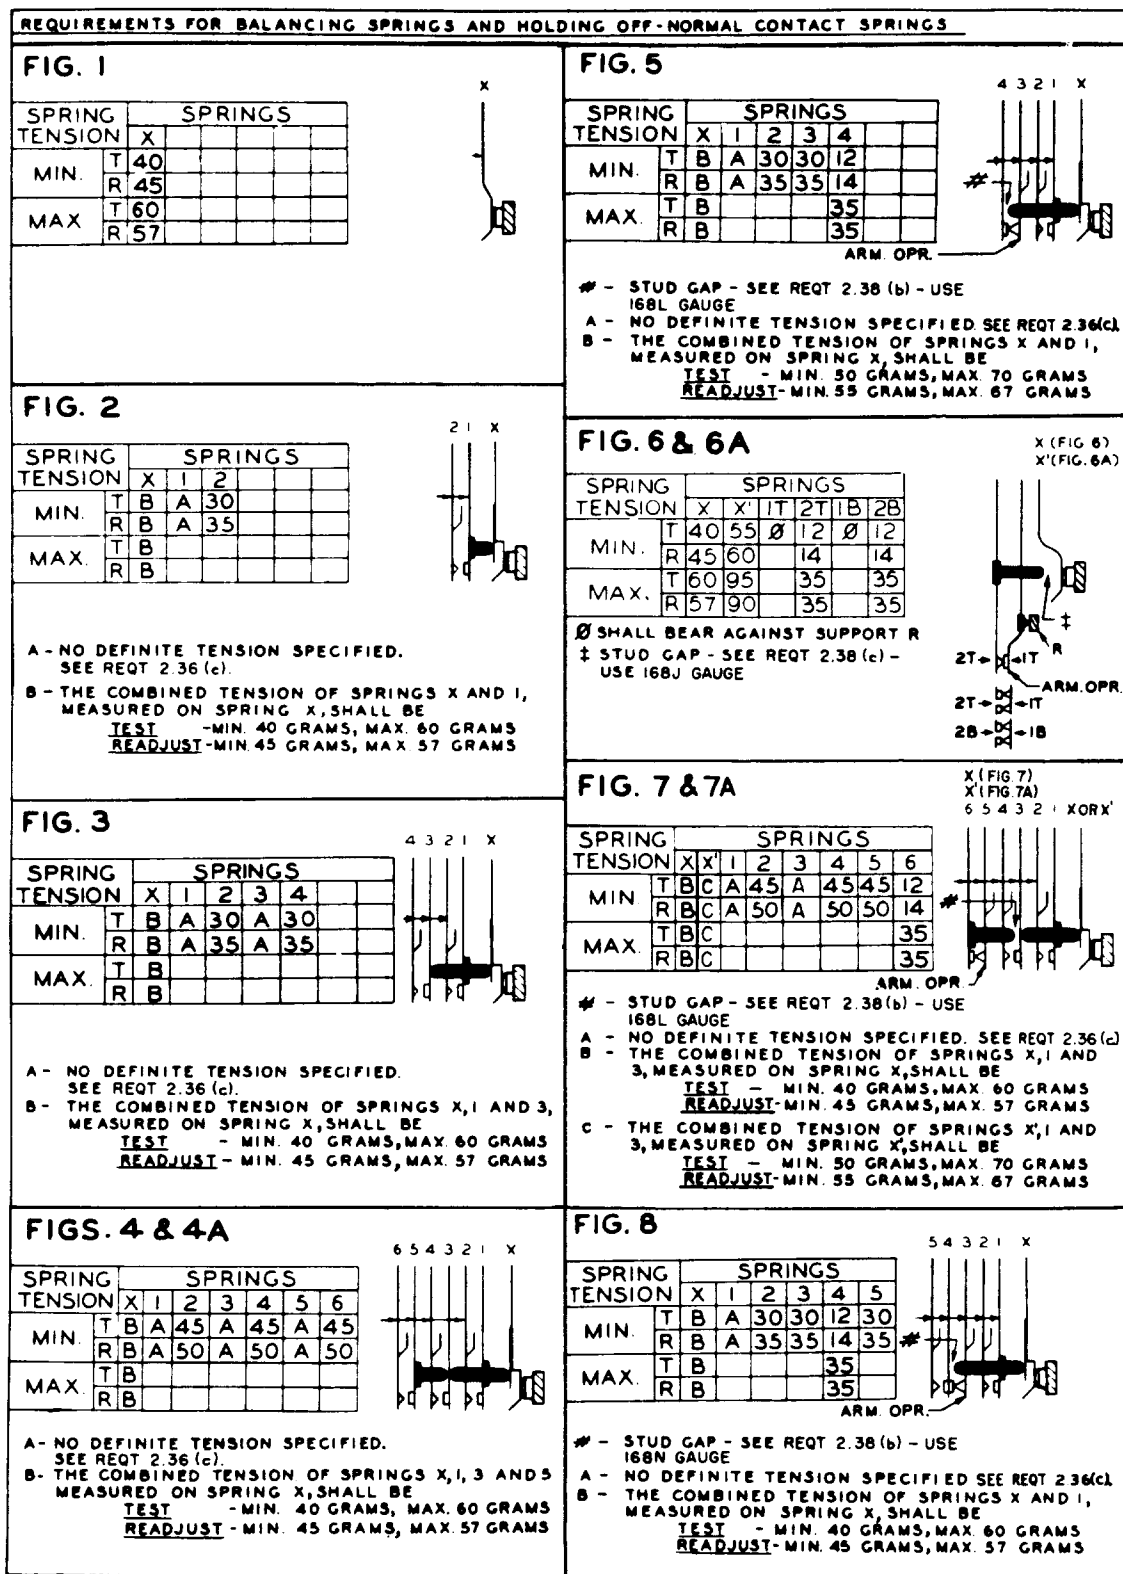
Requirements for Balancing Springs and Holding Off-Normal Contact Springs
